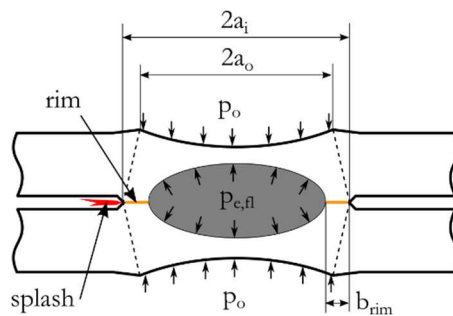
Enclosure of melt in the spot welding process.
